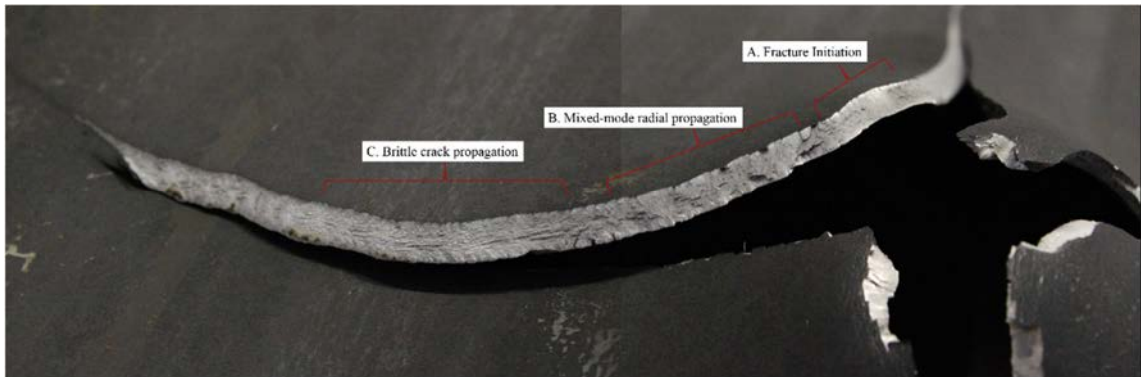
Composite image of radially propagating crack in HHA steel plate showing transitions in fracture surface appearance
